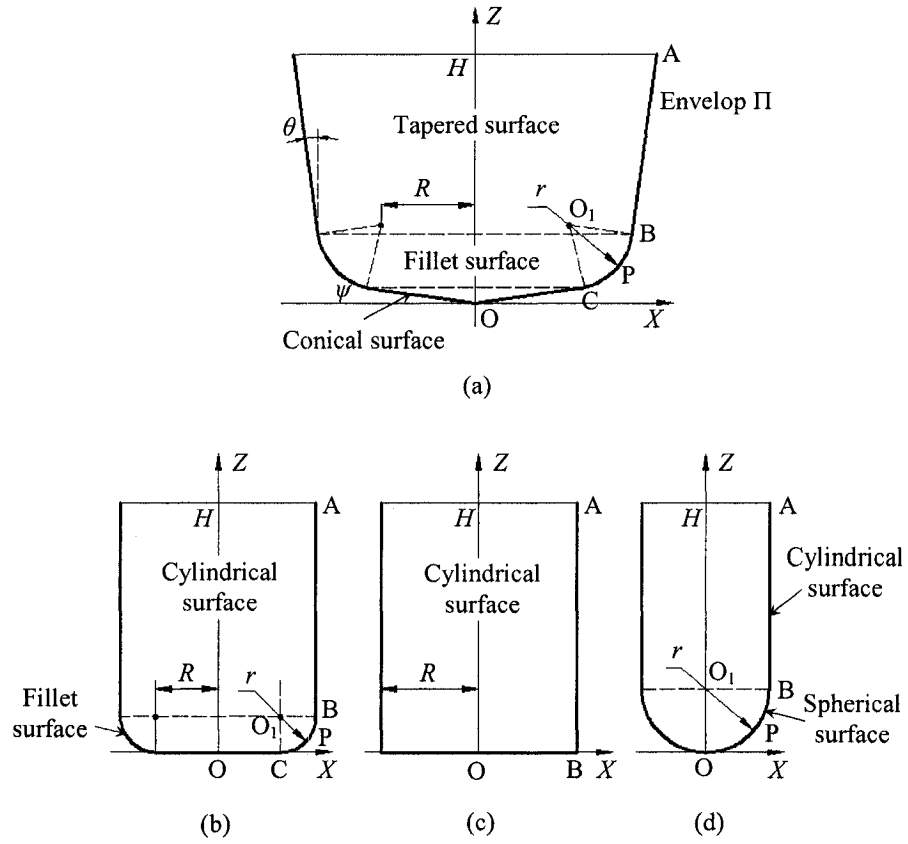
(a) An APT cutter, (b) a bull-nose end-mill, (c) a flat end-mill, and (d) a ball end-mill
